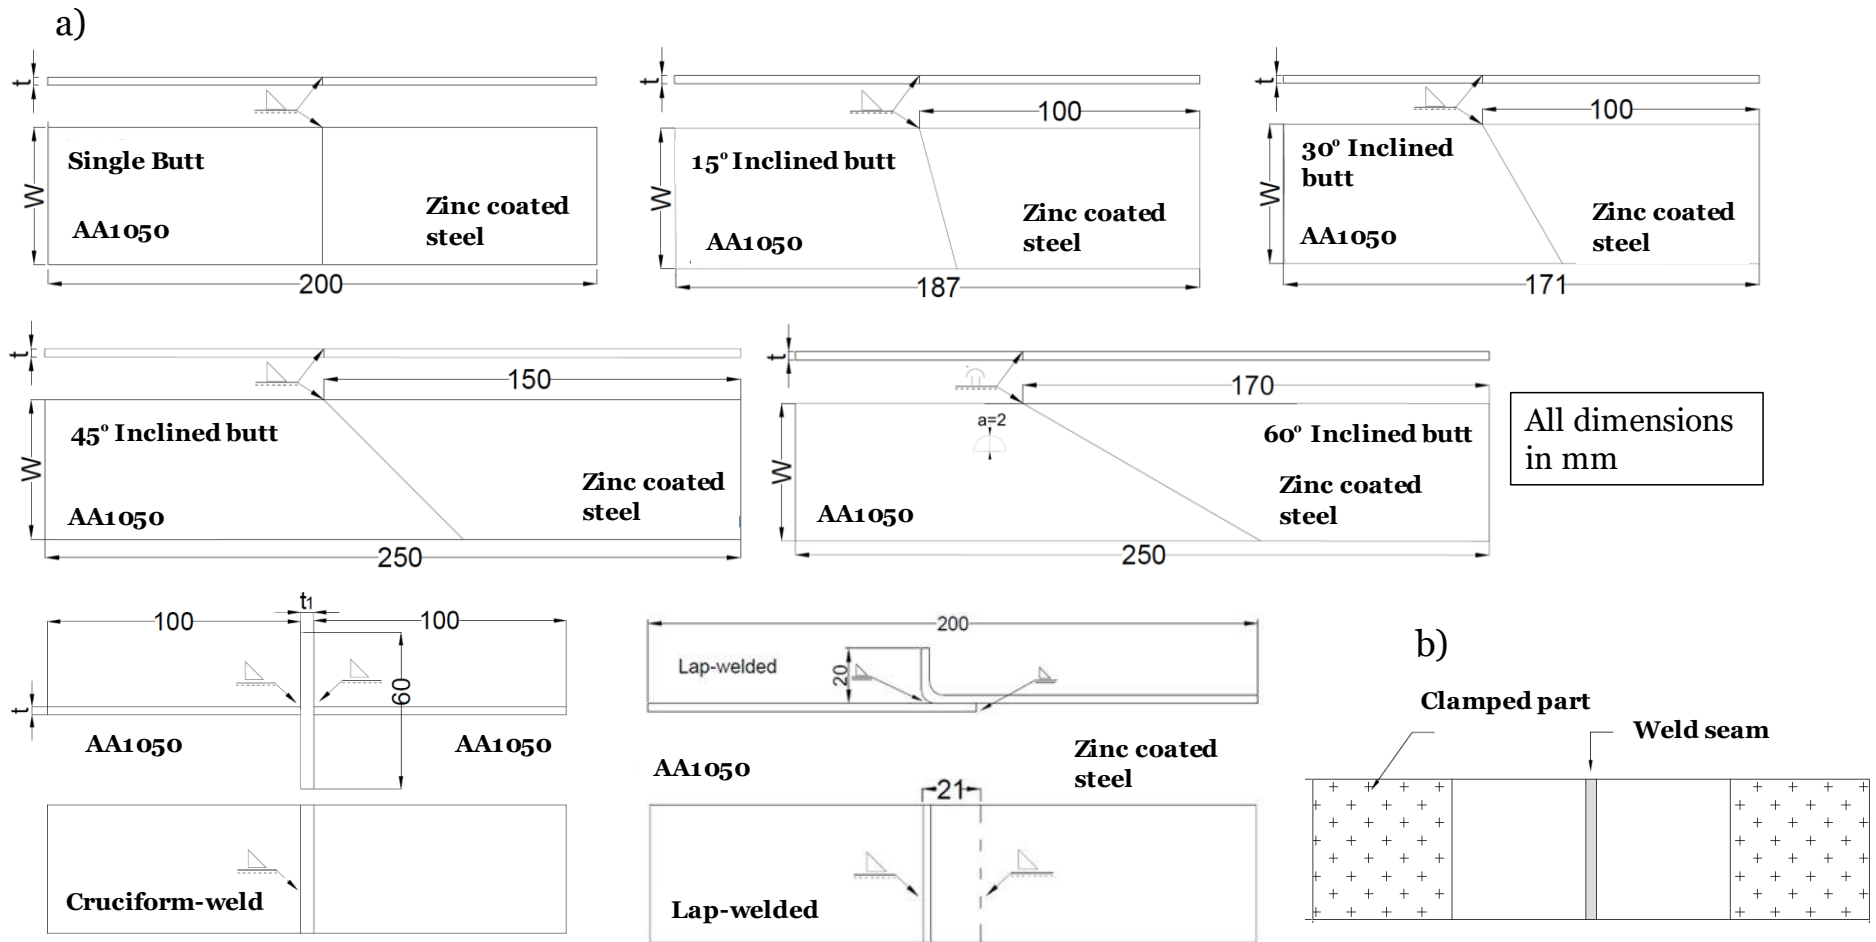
Geometry of the investigated aluminium-to-steel welded components (a). Schematisation of the tensile specimens (b).
